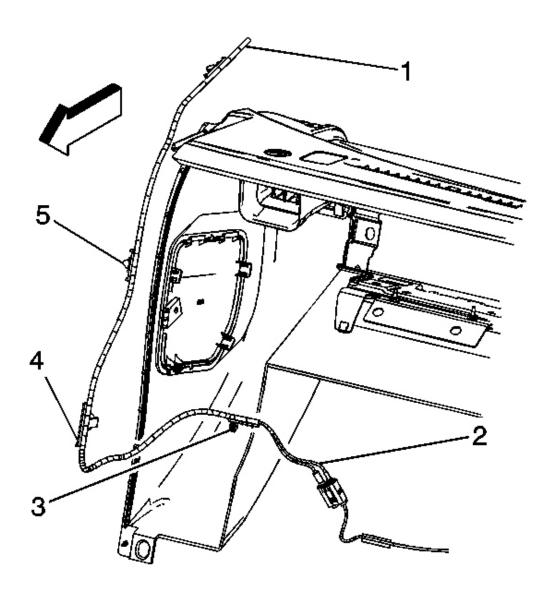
View Of Coax Cable & Components Courtesy of GENERAL MOTORS CORP.
